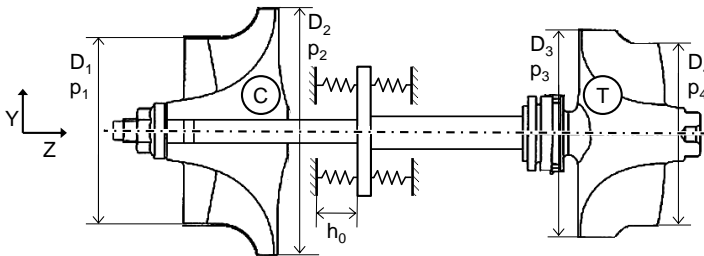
Turbocharger rotor with a compressor wheel (left hand side) and a turbine wheel (right hand side) and a thrust bearing in between. The thrust bearing carries the aerostatic loads from both sides of the two wheels as well as the impulse load of the air entering and exiting the turbocharger in axial direction.
